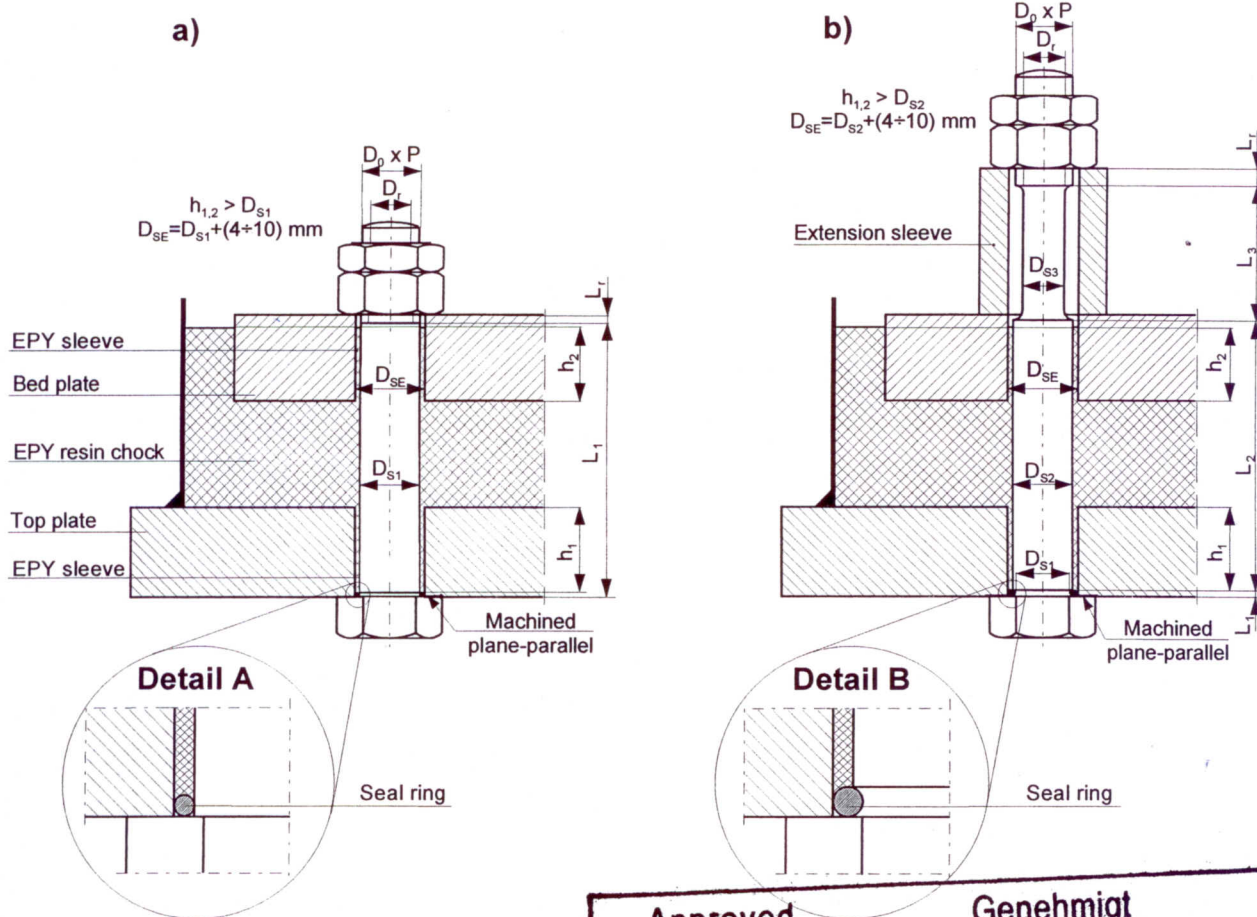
Illustration of a fitted bolts of cast-in-EPY resin type
